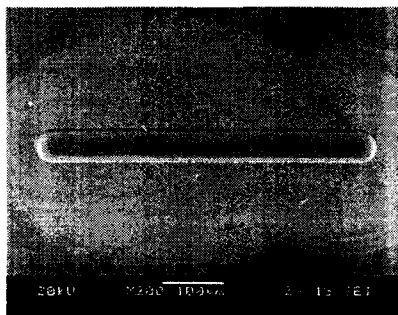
Groove with burr removal by electrical discharge machining during machining with 50 pF
